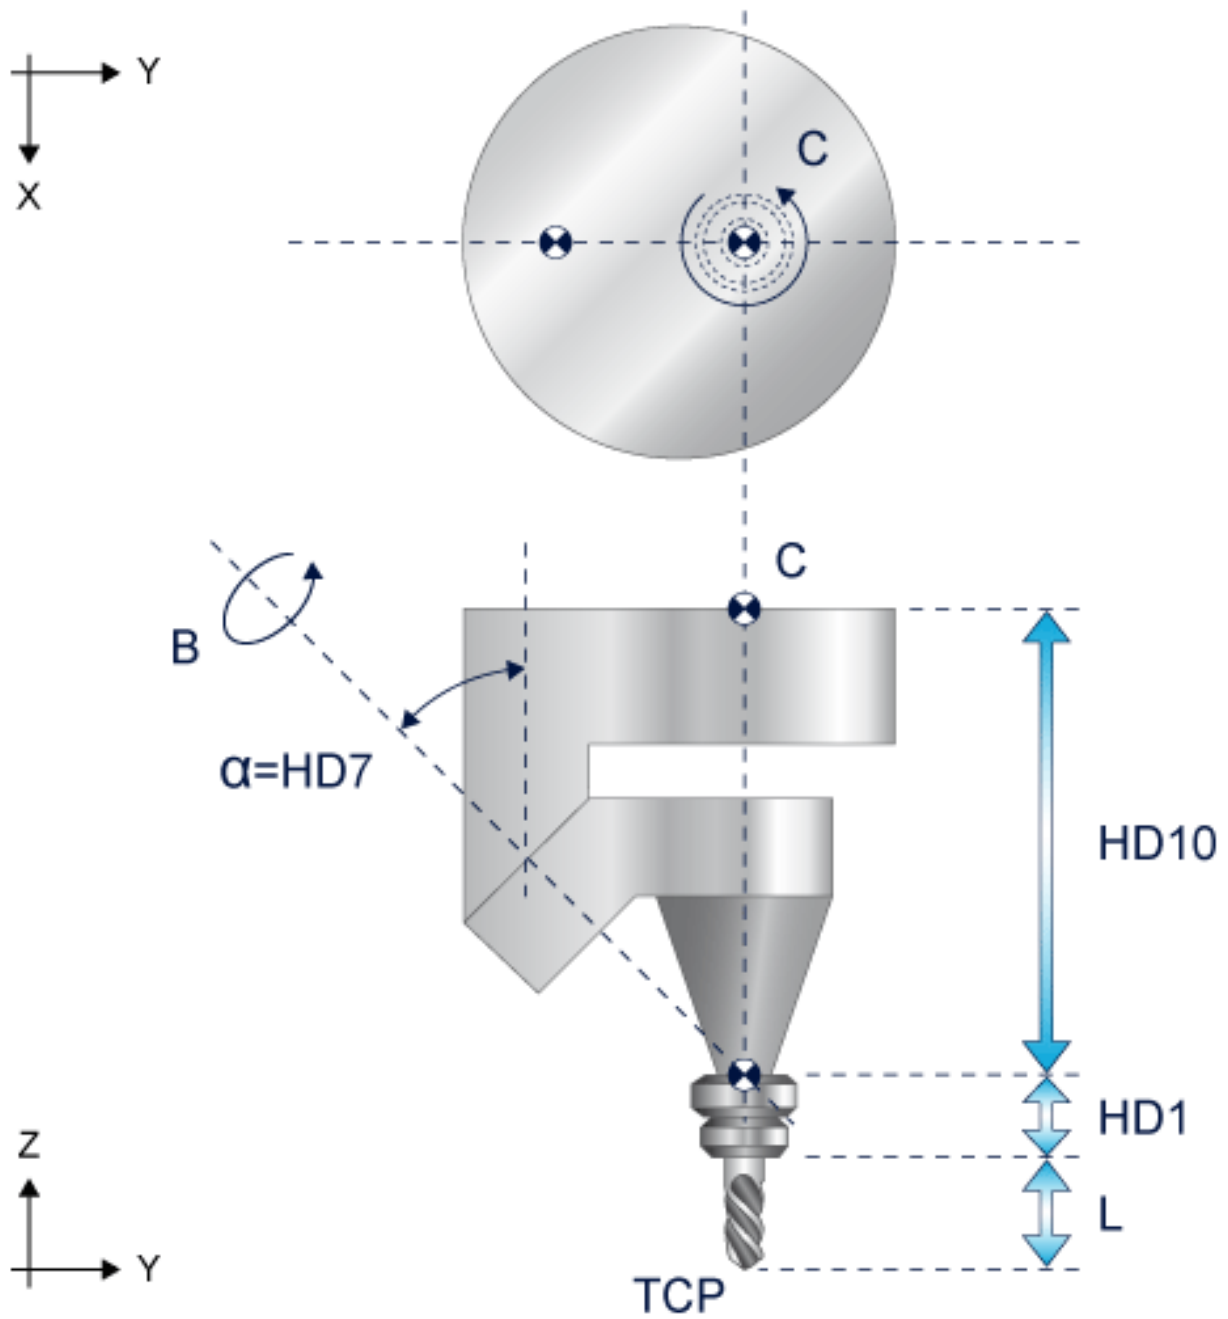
Cardanic head with ideal head geometry (intersection of C and B axis located in tool axis)
